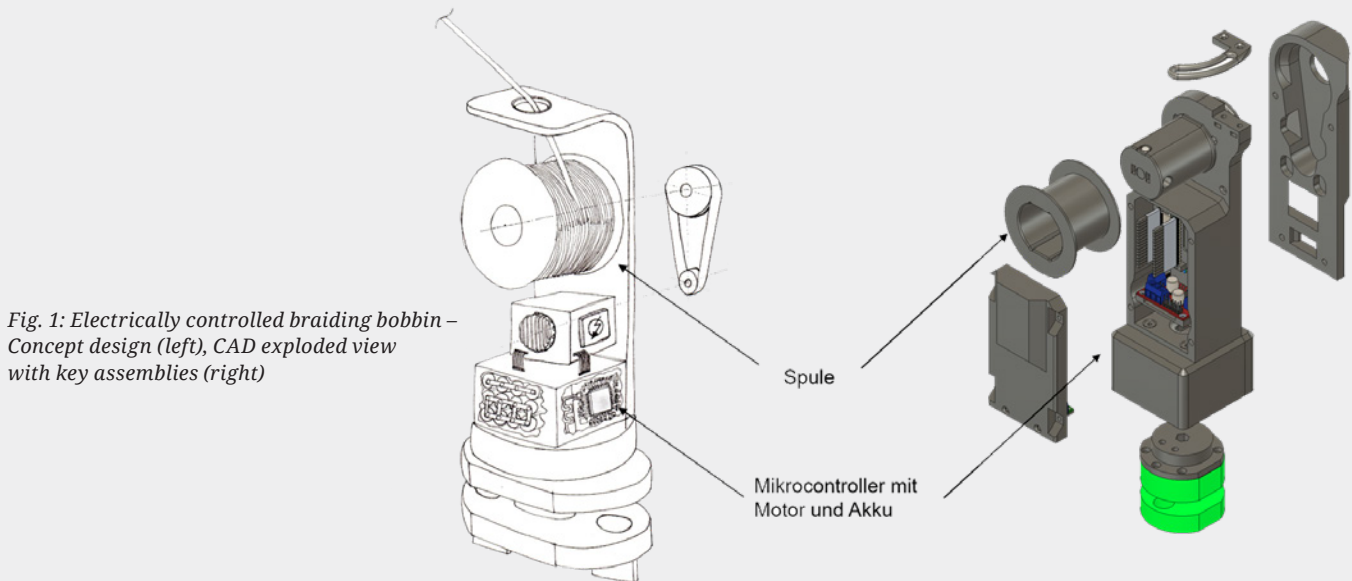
Electrically controlled braiding bobbin – Concept design (left), CAD exploded view with key assemblies (right)
